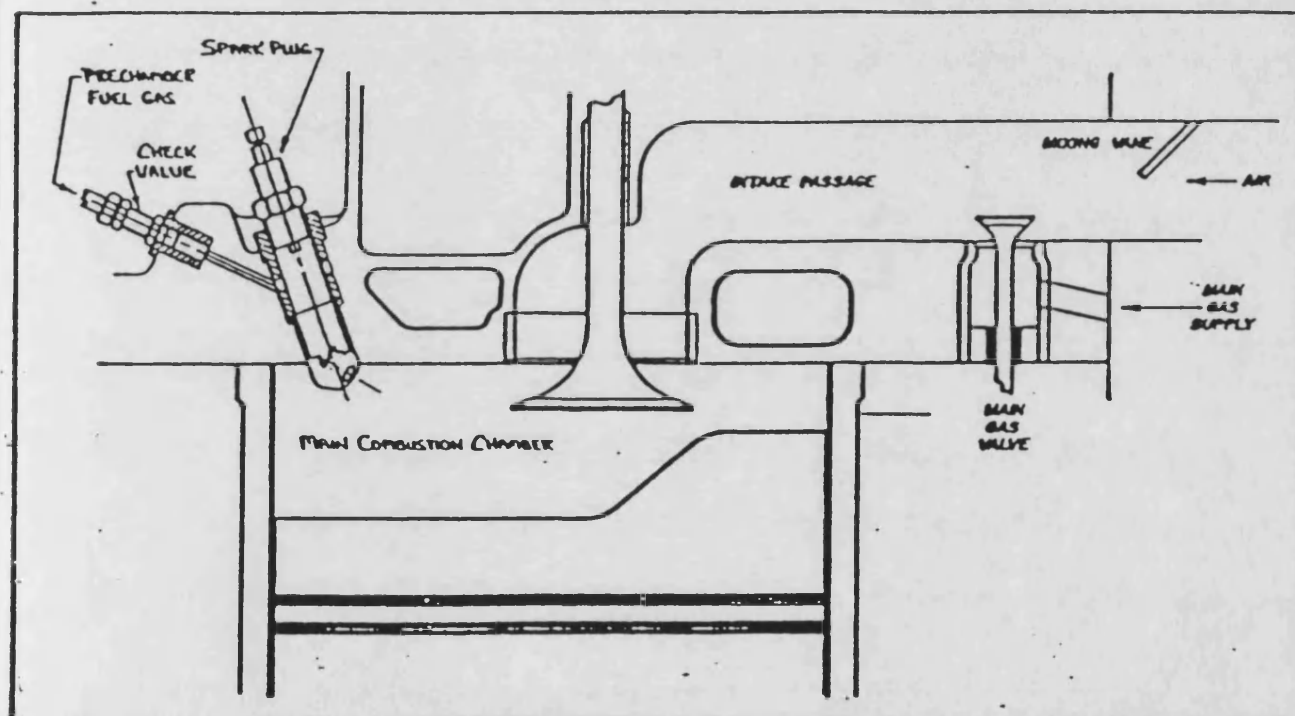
Superior Clean Burn Cylinder Head and Prechamber
